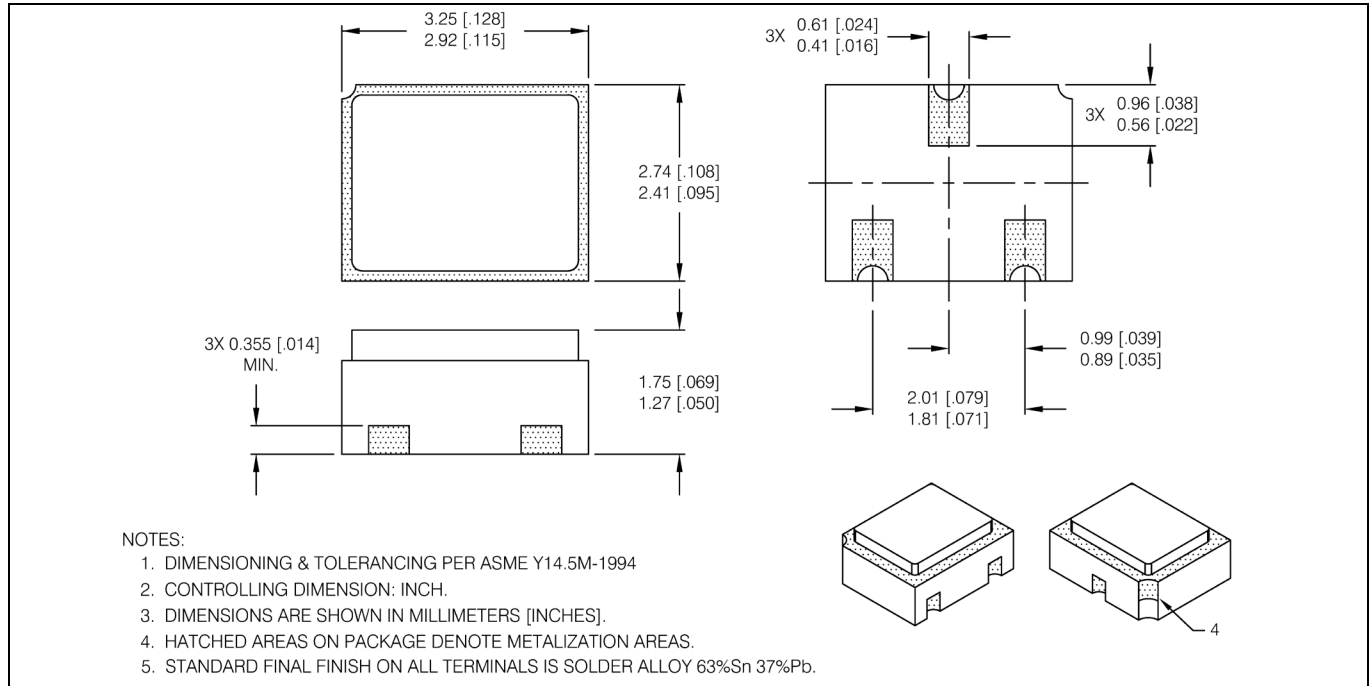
SMD-0.2 outline drawing (see [website](#))
